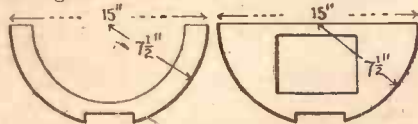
The shape and dimensions of the top rail and the bottom for the draining tray. Both can be marked out and then cut with a fretsaw.
